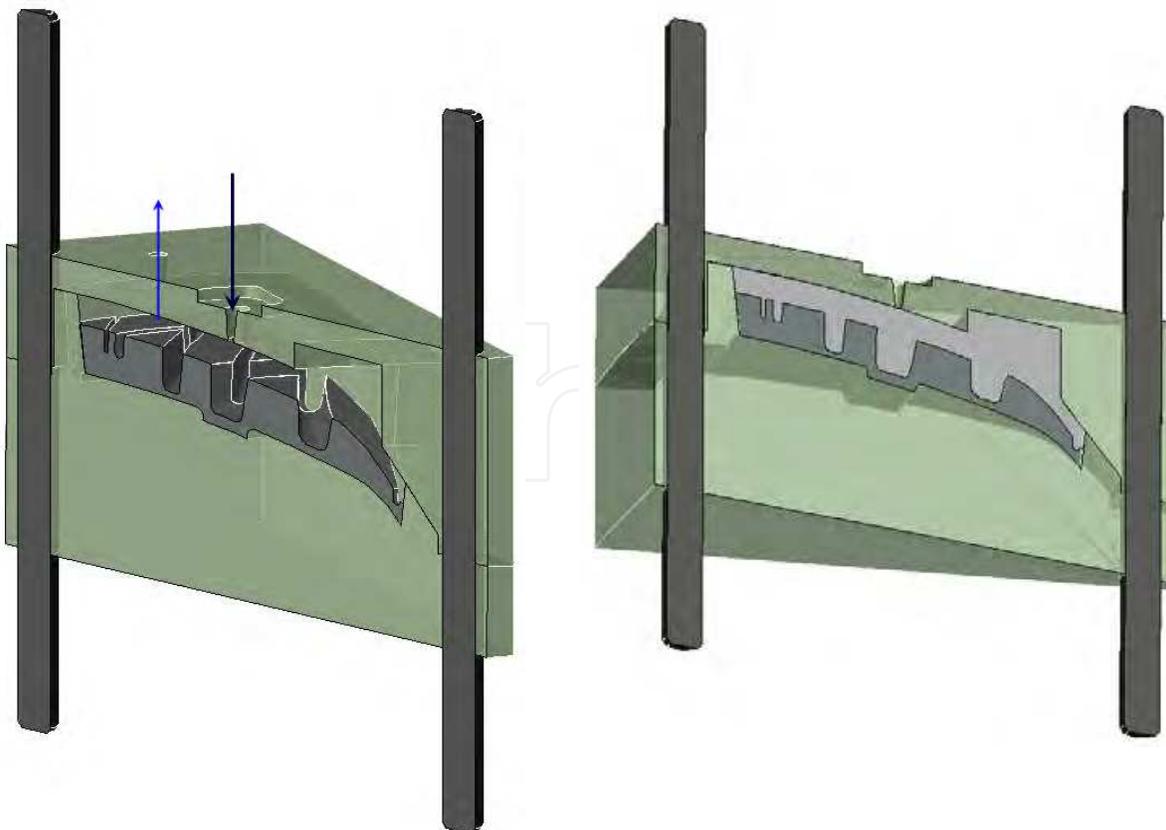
Die-casting of one-pitch-segment of tread ring.
